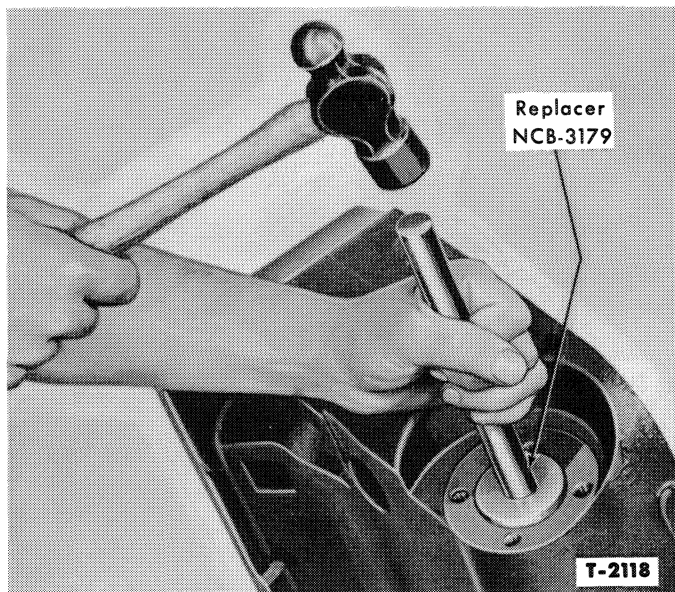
Removing or Installing Pedestal Sector Shaft Bushings
